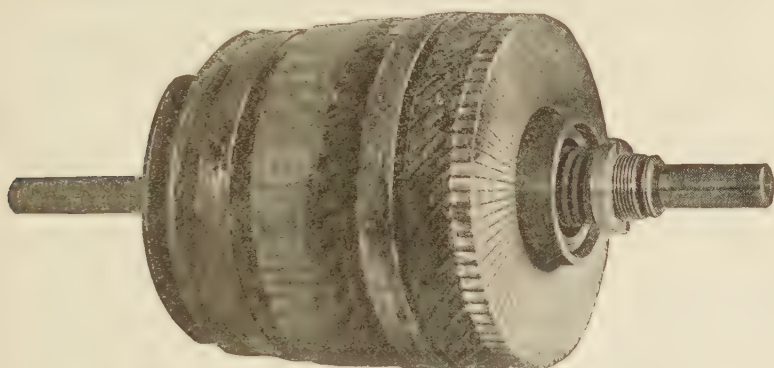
(a).—Rotor of a Wagner single-phase, type BA motor.
